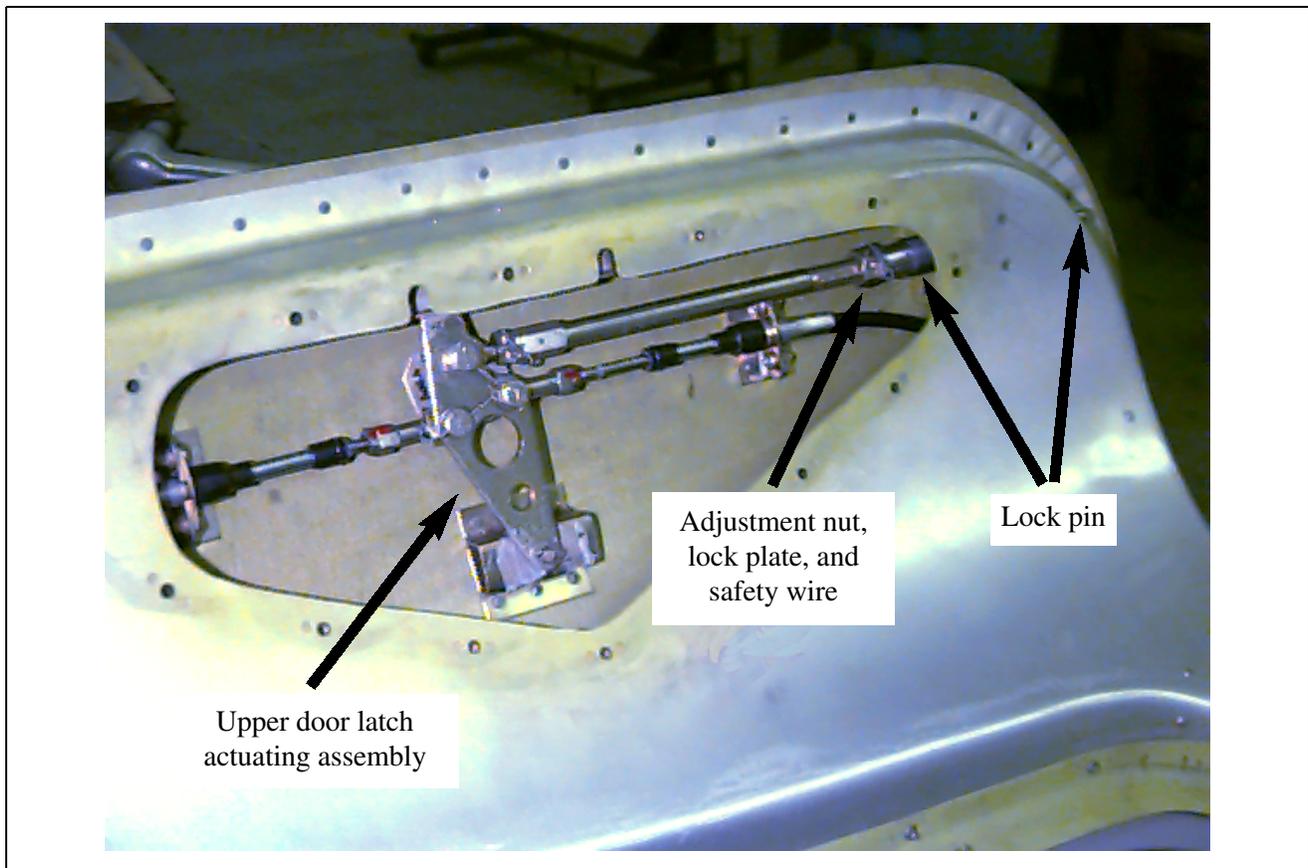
Adjustment of Upper Door Latch on Forward Cabin Door
